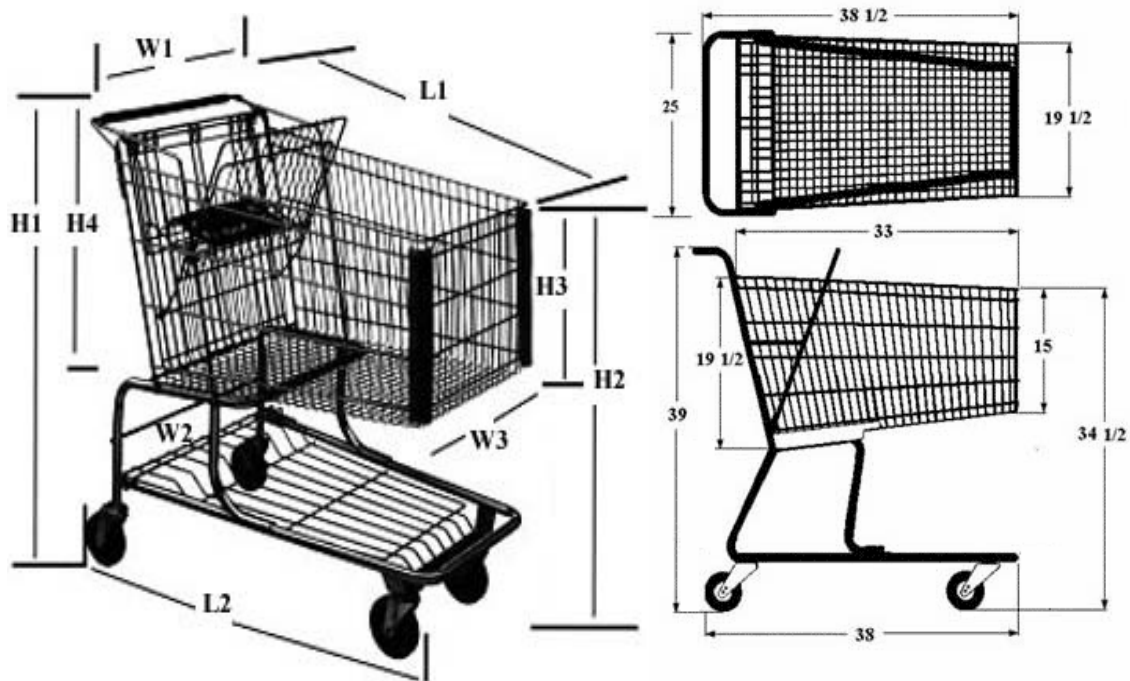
Cart dimensions: a) main dimensions b) a typical cart [5]
